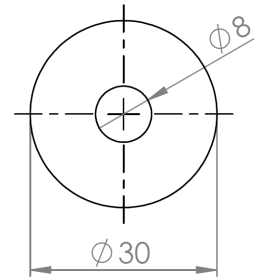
Drawing of the outside shield (6 mm acrylic sheet).
